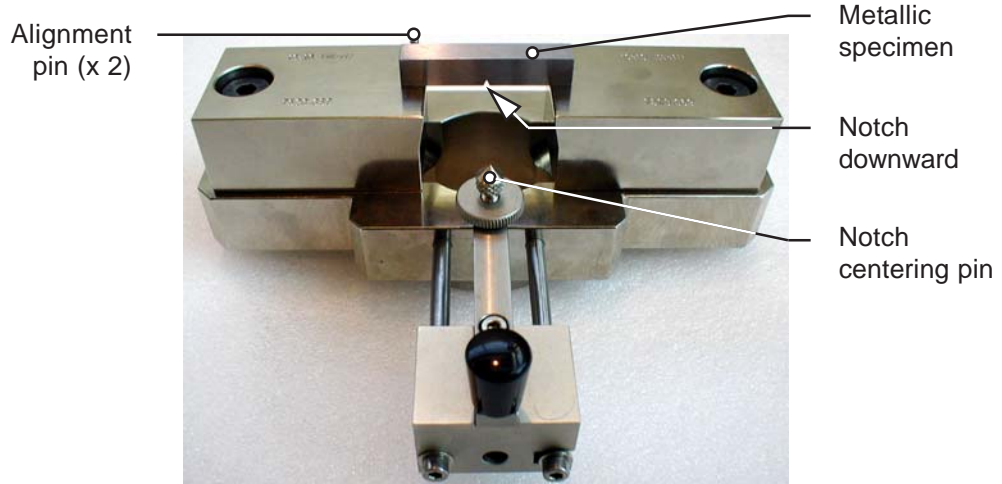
Fixture for Charpy test with shoulders according to ASTM E-23 standard (notched metallic specimen)
